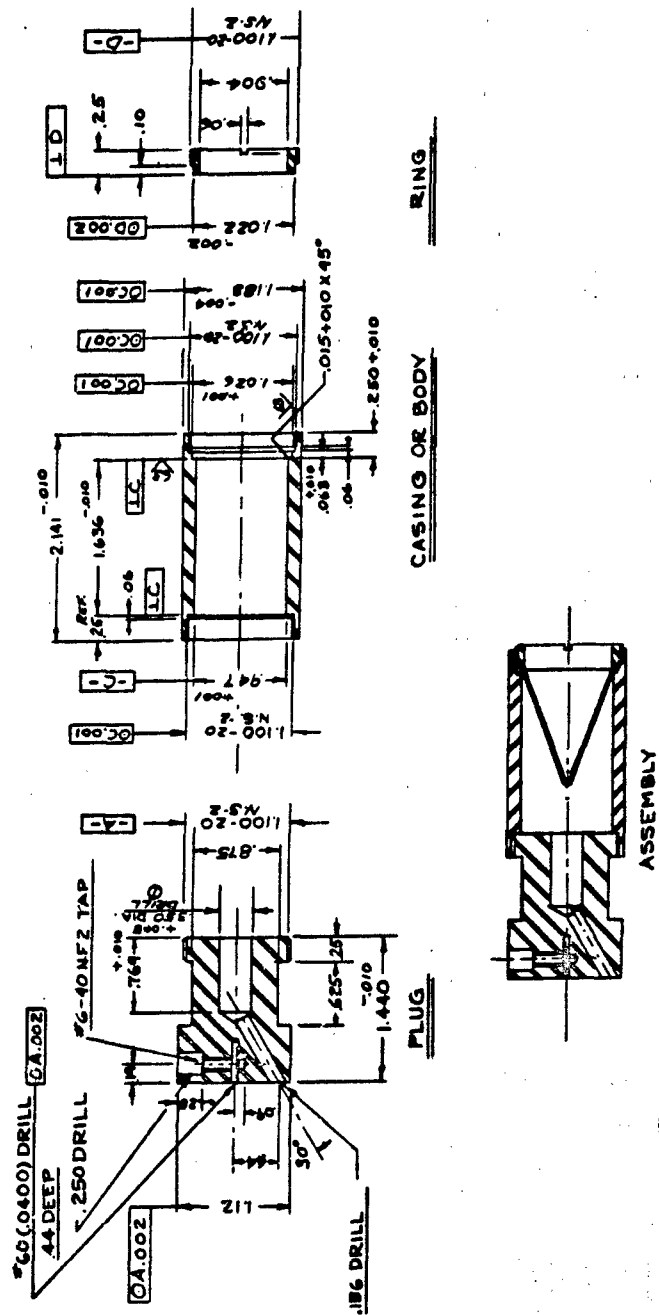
Test Body Details and Penetration Assembly, Scale 1.
